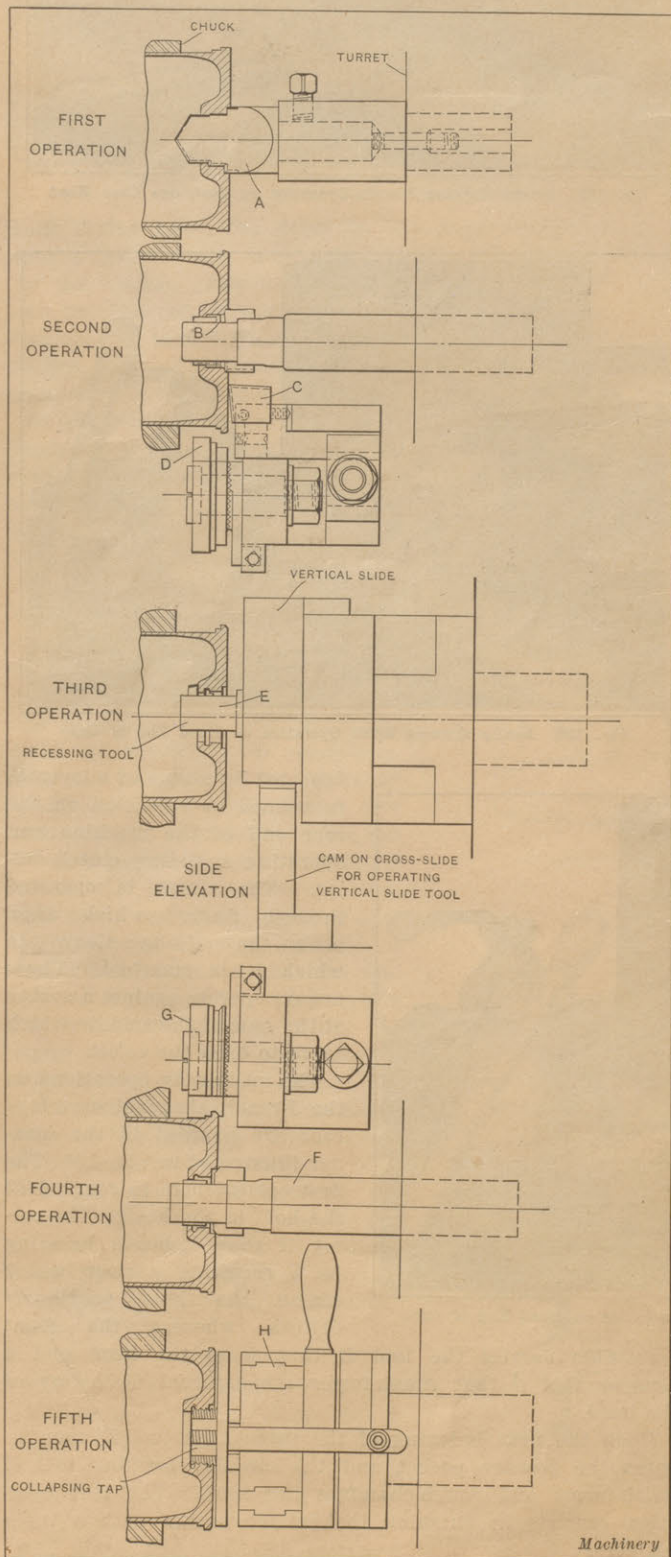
Tooling Set-up for machining 18-pound Cartridge Case
